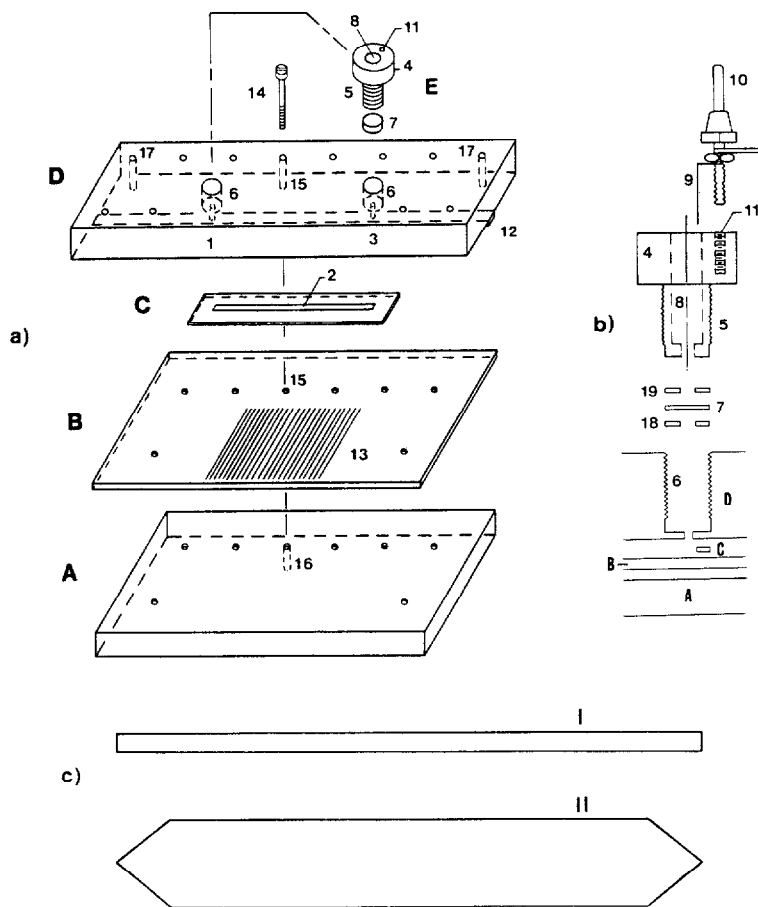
Schematic representations of exploded assembly of the CapScan capillary IEF separation cell (a), the electrode assembly (b) and the focusing troughs employed (c). A = Thermostated aluminum plate; B = sensor bearing glass plate; C = silicone rubber gasket; D = block of plexiglass; E = electrode compartments; 1-3 = separation trough; 4 = membrane holder with electrode compartment; 5 = thread for mounting of membrane holder; 6 = threaded hole in plexiglass block; 7 = membrane; 8 = electrode compartment; 9 = platinum electrode; 10 = banana plug for power connection; 11 = threaded hole for mounting of banana plug; 12 = sealing edge; 13 = detection electrodes; 14 = mounting screw; 15 = screw hole; 16 = threaded hole; 17 = screw hole for cell attachment to the scanner (not shown); 18 and 19 = ring-shaped silicone gasket; I = column I having a width of 1-2 mm; II = column II with a width of 15 mm. Not shown in these figures are the power supply, the mechanical scanner and the computer system. For a block diagram of the entire CapScan system see ref. 4.
